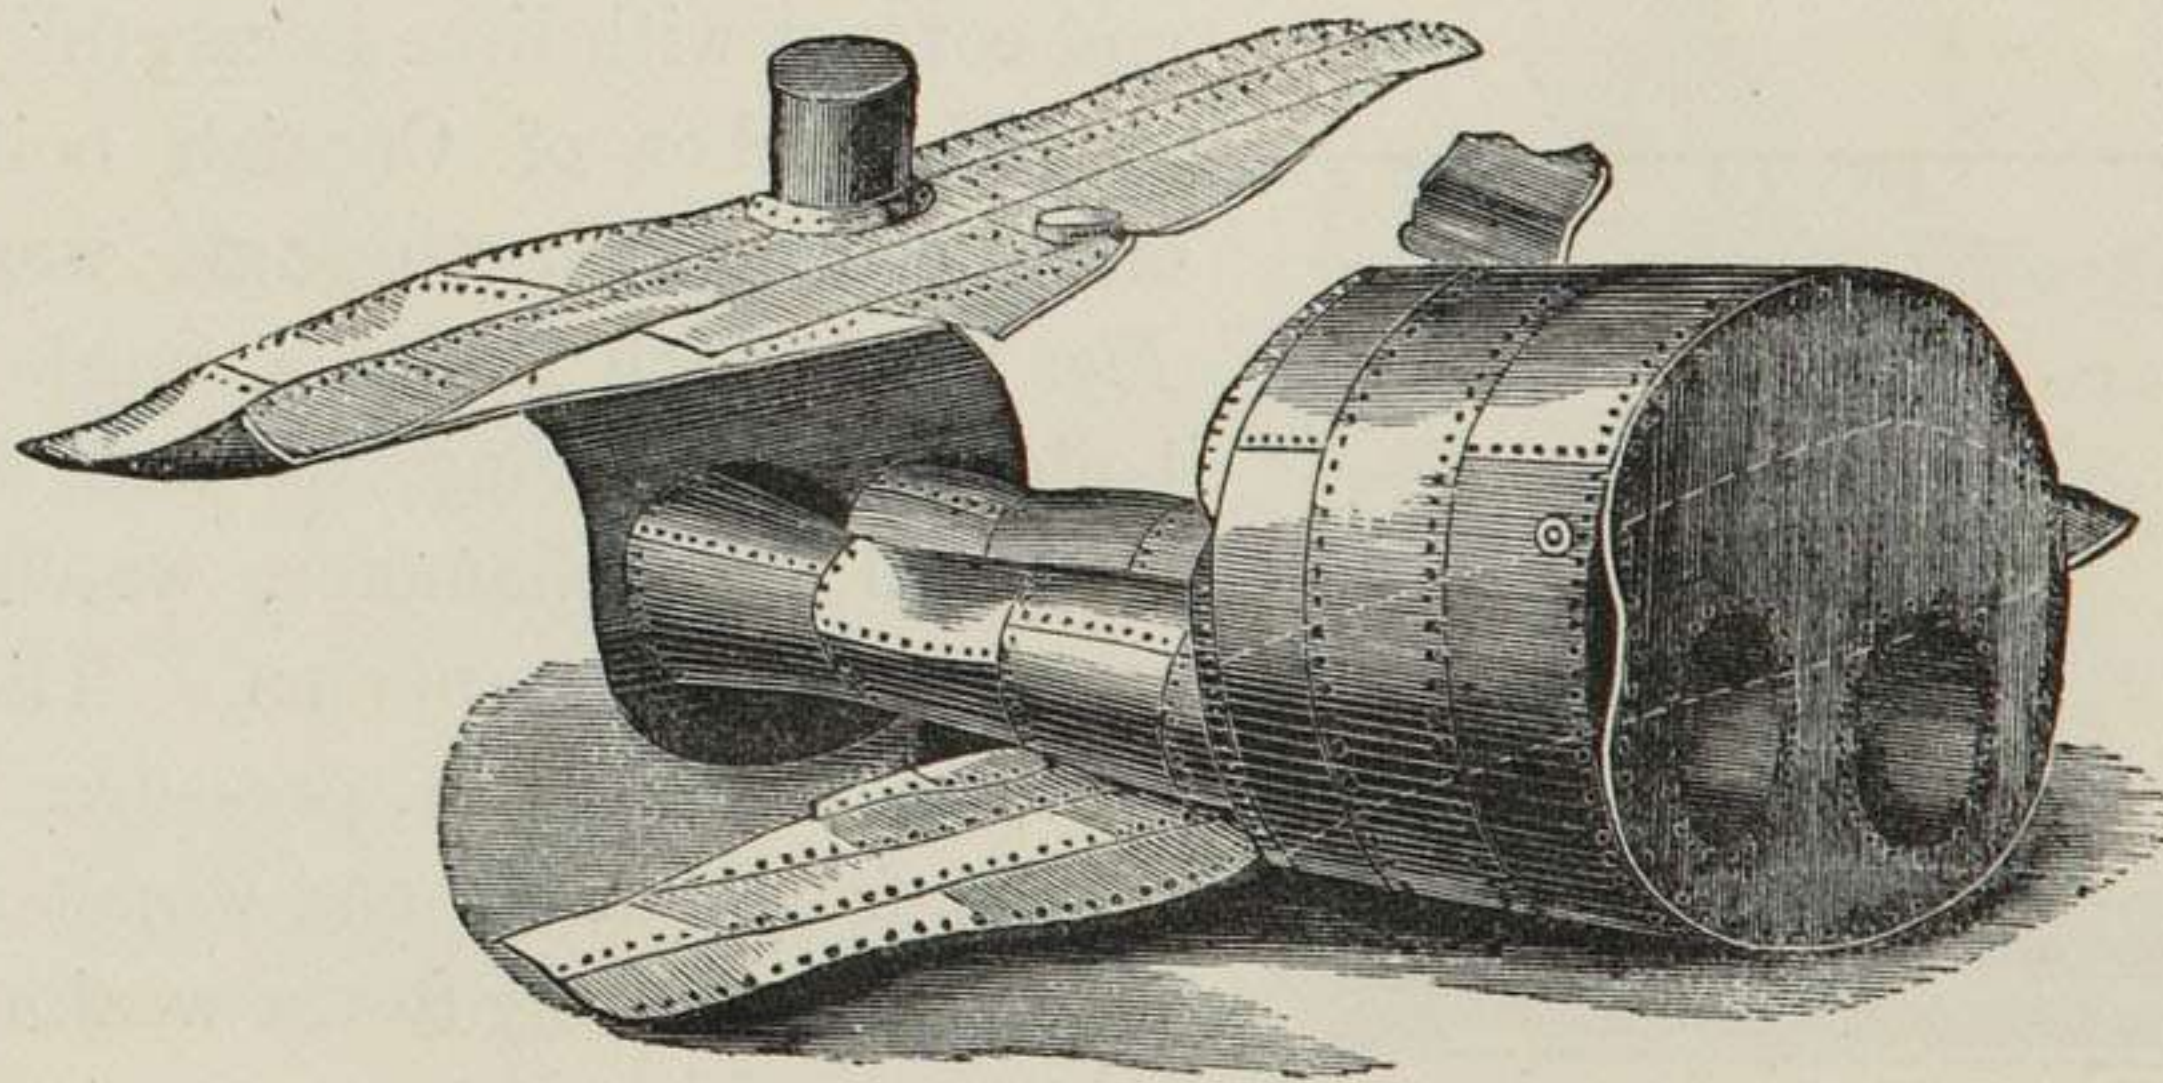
Cornish Boiler, exploded from neglected corrosion.
